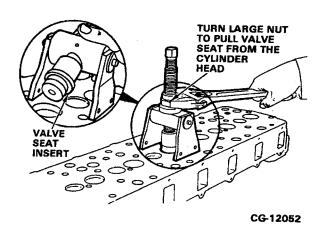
Pull Valve Seat Insert from Cylinder Head
